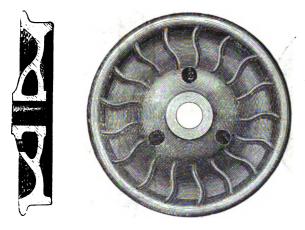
Fig. 158. Section. Back View. SINGLE-PLATE WHEEL
